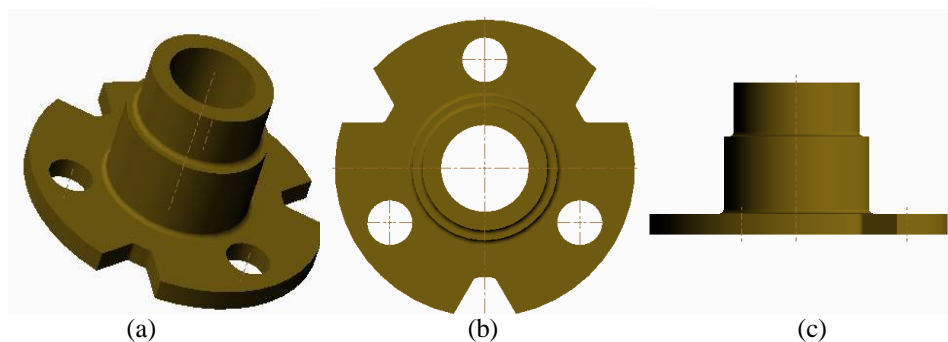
Creo model of flange-2 (a) slanted view (b) top view (c) front view
